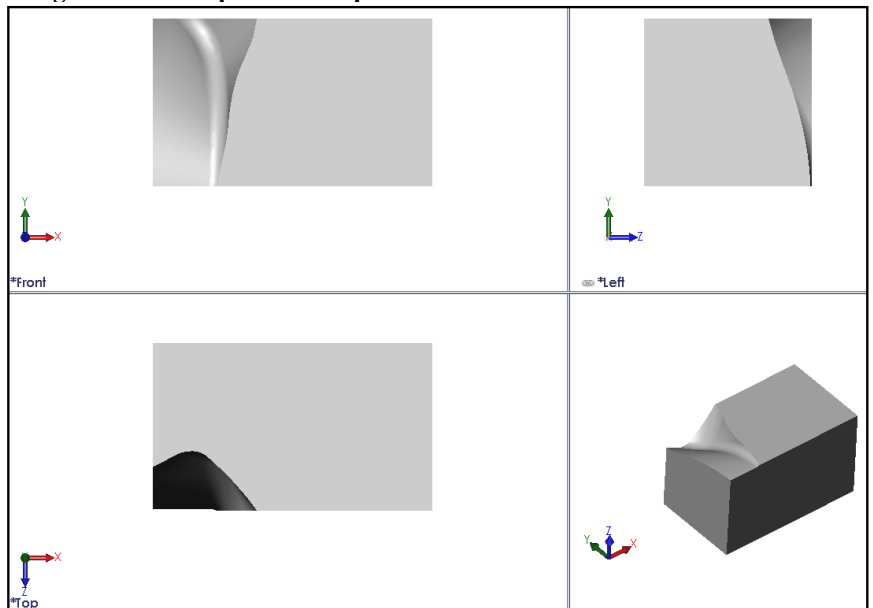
Output for tool path in Annexure 2 by solid sweep methodology.
